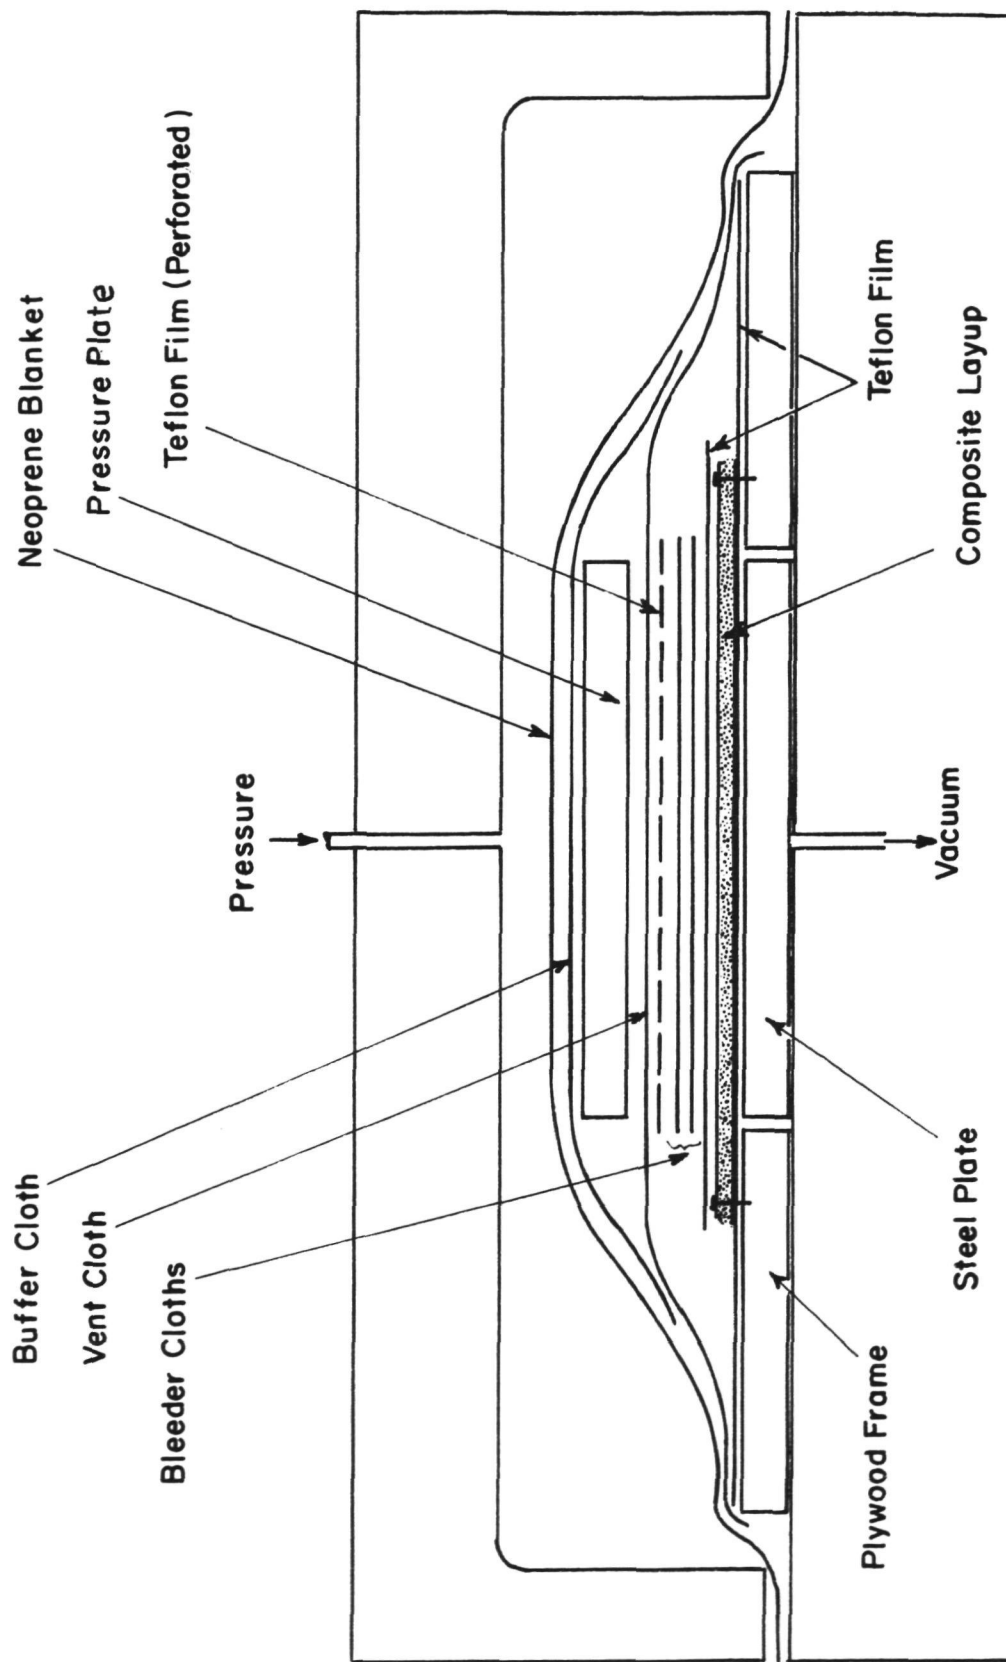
Sketch showing the arrangement of material layers employed in the fabrication of angle-ply birefringent composite laminates during the first stage of curing.
